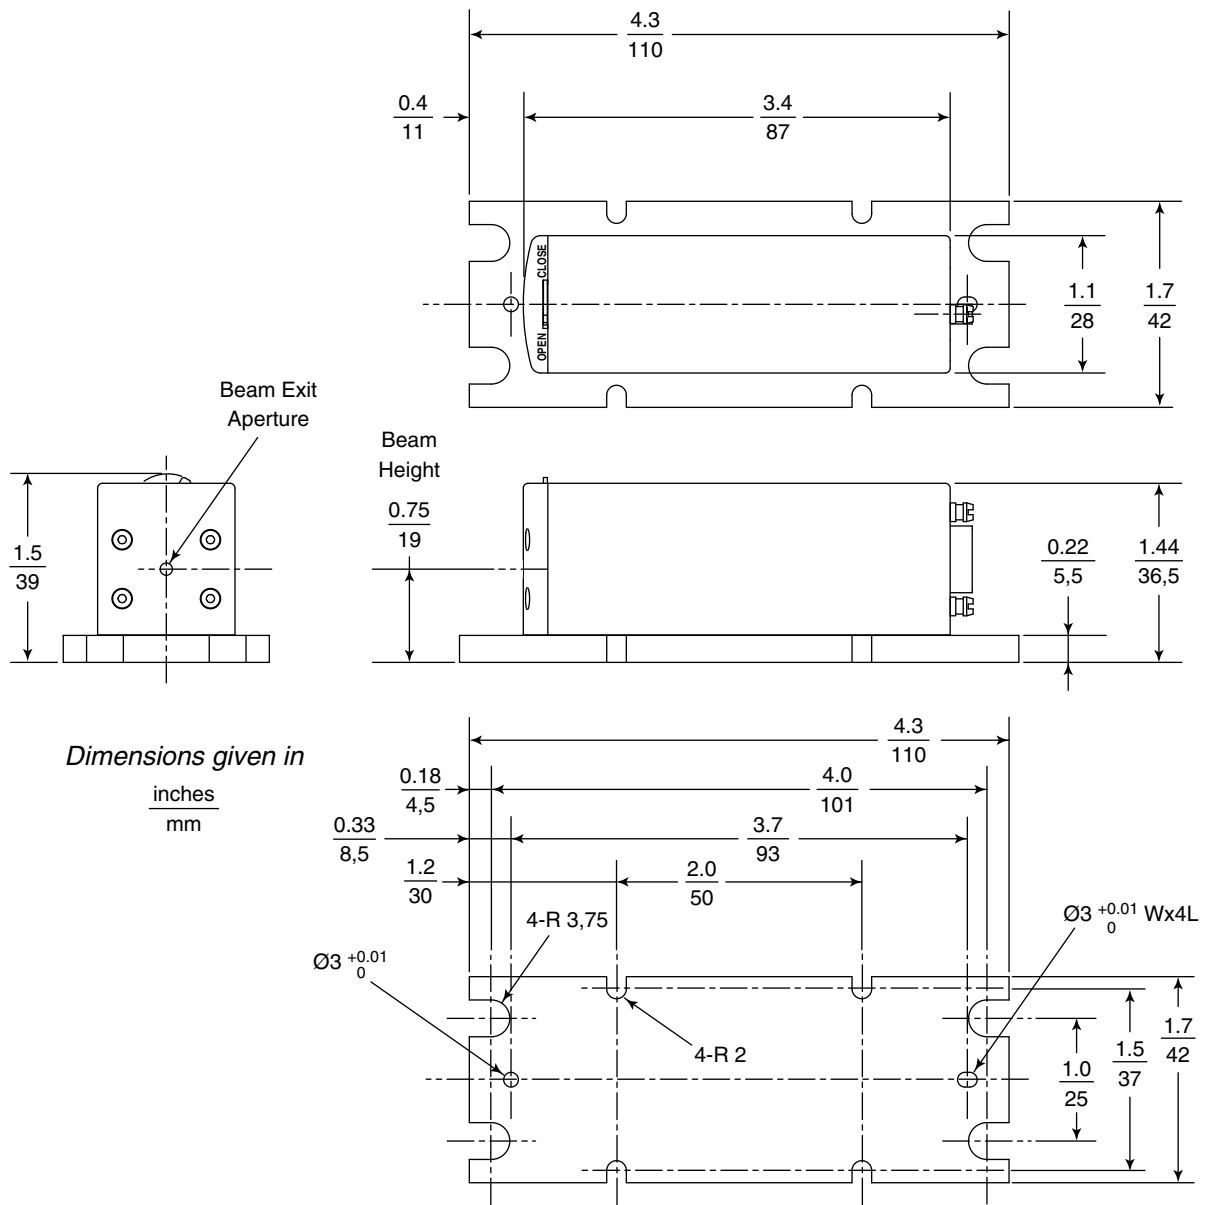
Outline Drawing of the *Excelsior DPSS-CDRH* Laser Head
